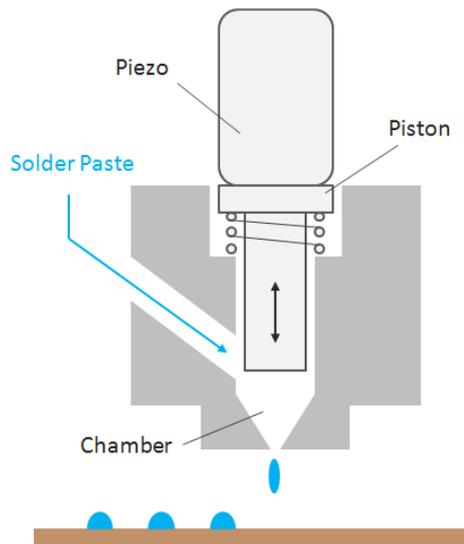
Solder paste dispensing printing head process, also known as high-speed jetting.
